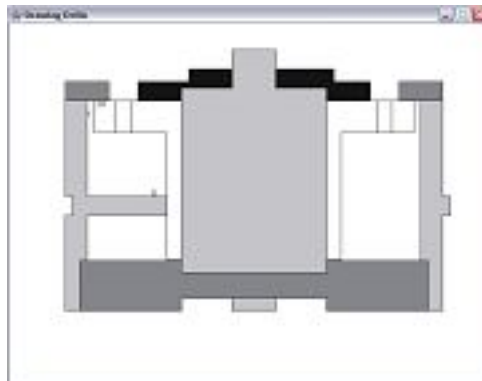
Complete Jigs and Fixtures Design for drilling the work
